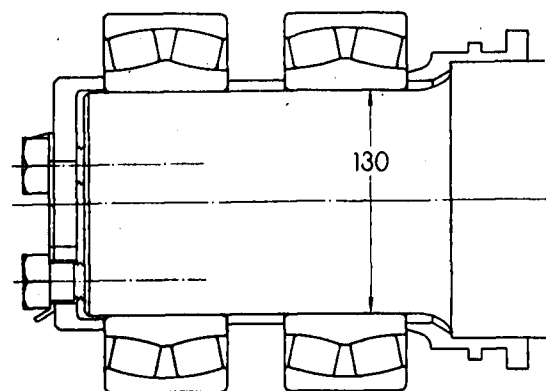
Axle bearing arrangement incorporating spherical roller bearings. U.I.C. 130 mm journal. Bearing dimensions: $130 \times 220 \times 73$ mm.
